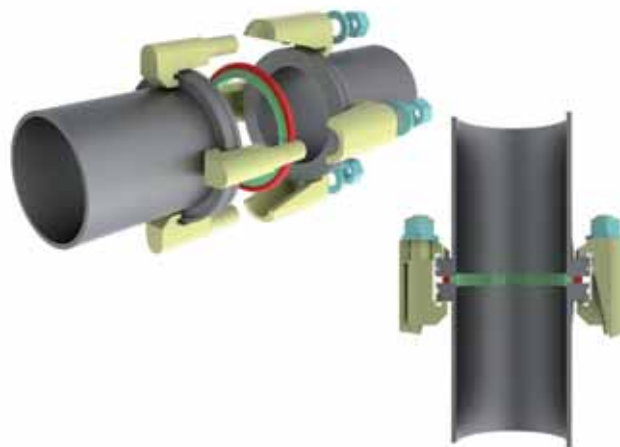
ISO-K connection with centering ring and double claw clamps
